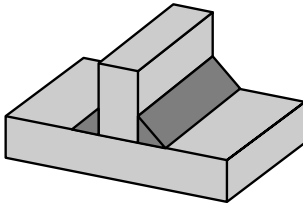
Double fillet weld, subject to a load perpendicular to the welding axis
